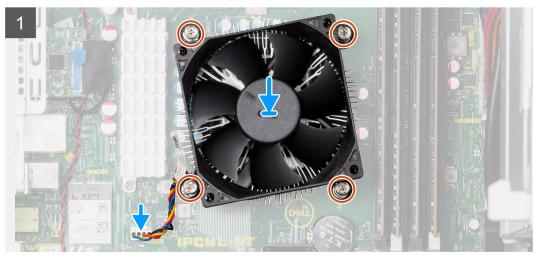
Heatsink assembly - 65 W or 80 W CPU
